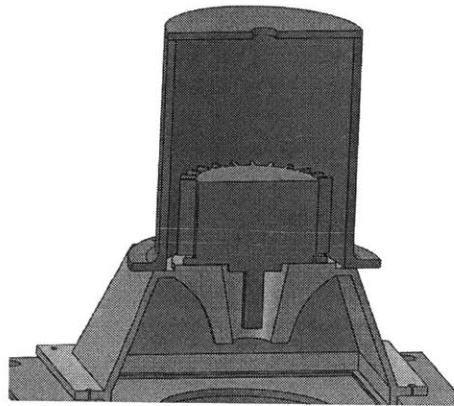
Model section view of the generator cap, showing the turbine casing, generator and cap. Coloured to distinguish the separate components.
